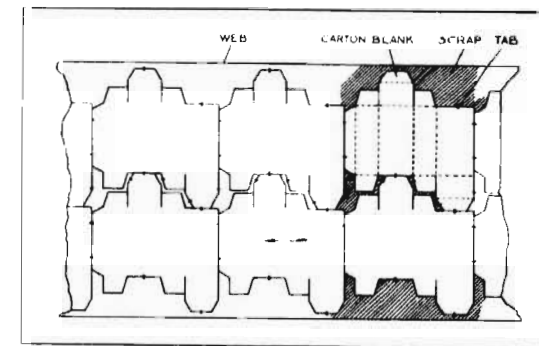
Cardboard web layout showing die-cut carton blanks and the attached scrap material.
